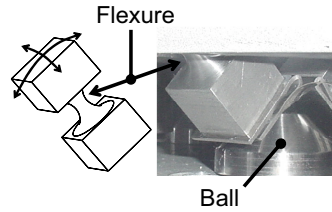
Prototype of hour glass groove flexure bearing for HPF
